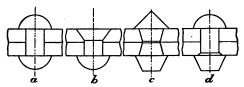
Rivet Heads. a, button-head; b, button- and counter-sunk heads; c, steeple- and pan-heads; d, button- and pan-heads.
